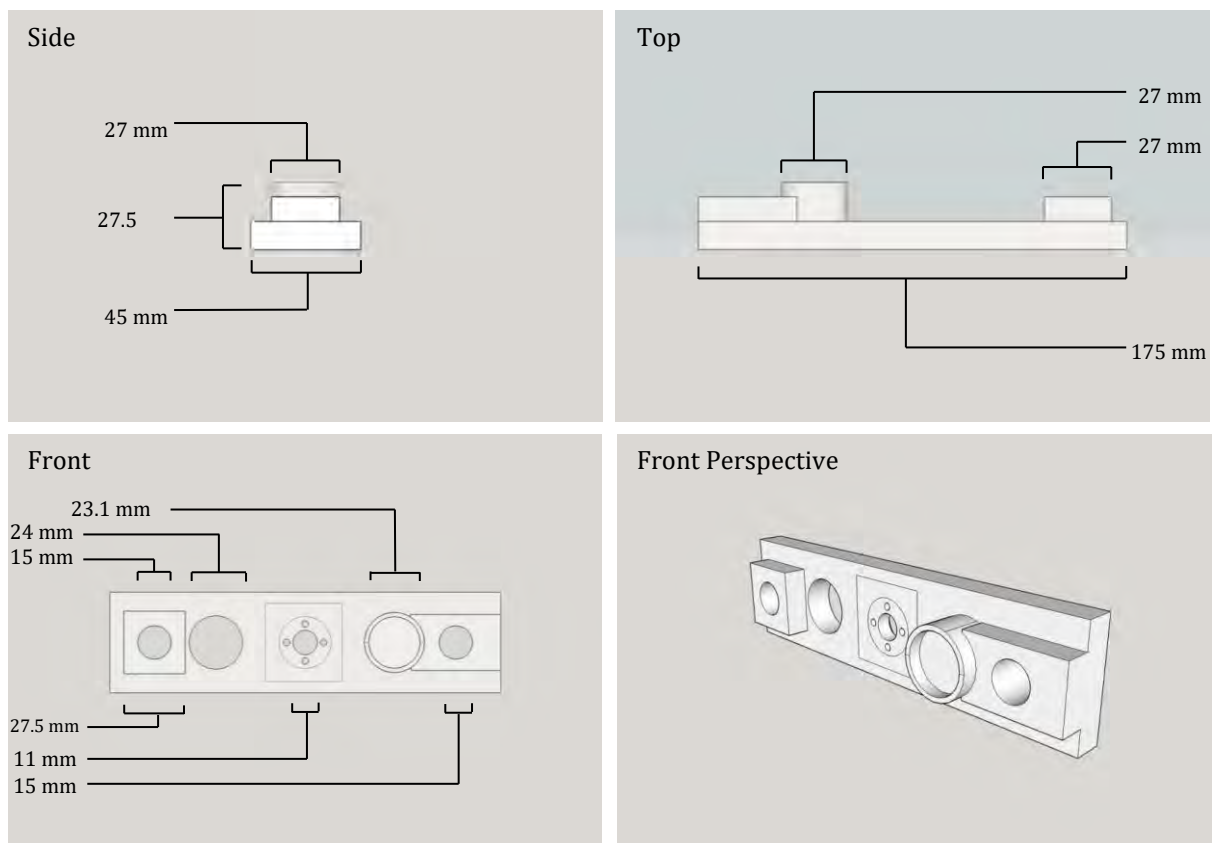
CAD model of the 3D printed connective bar component of the completed motorized media pumping system.
